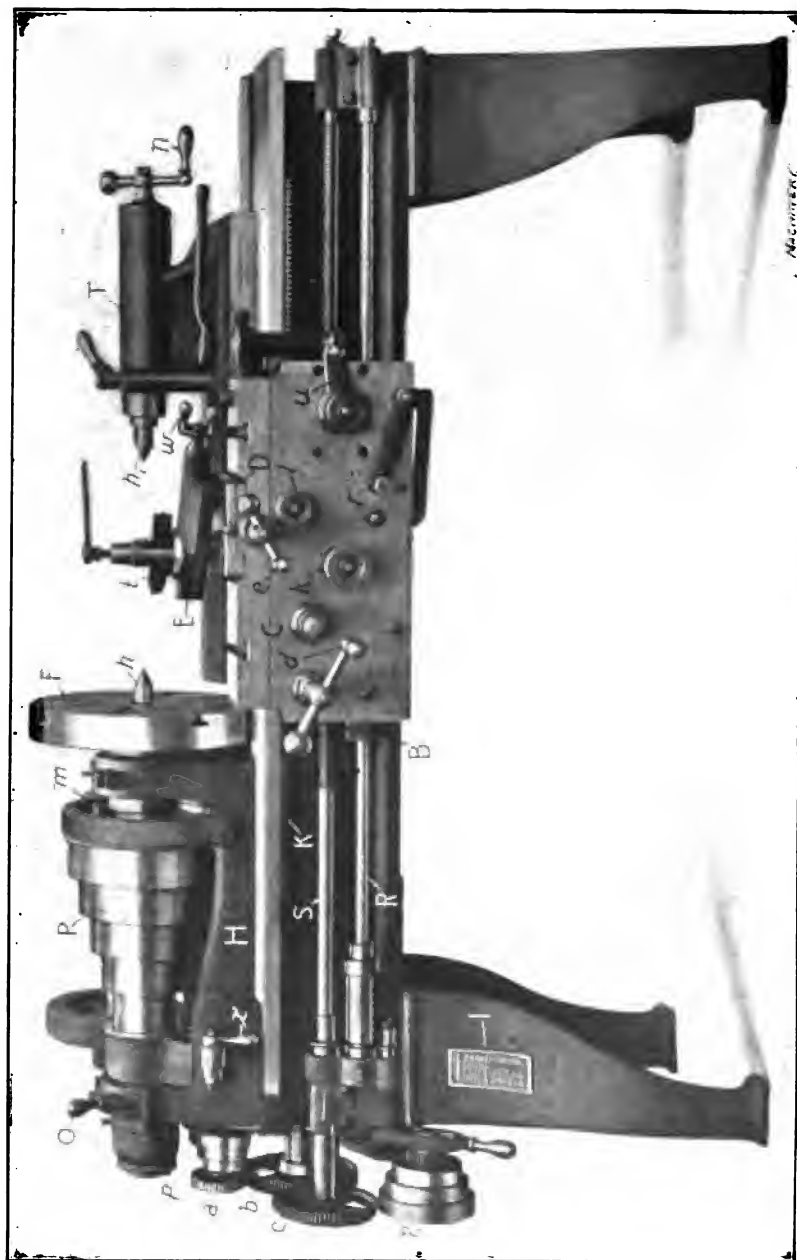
Bradford Standard Lathe—View of Front or Operating Side
